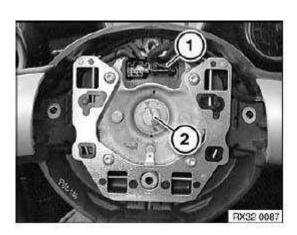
Identifying Plug Connection And Screw Courtesy of BMW OF NORTH AMERICA, INC.
